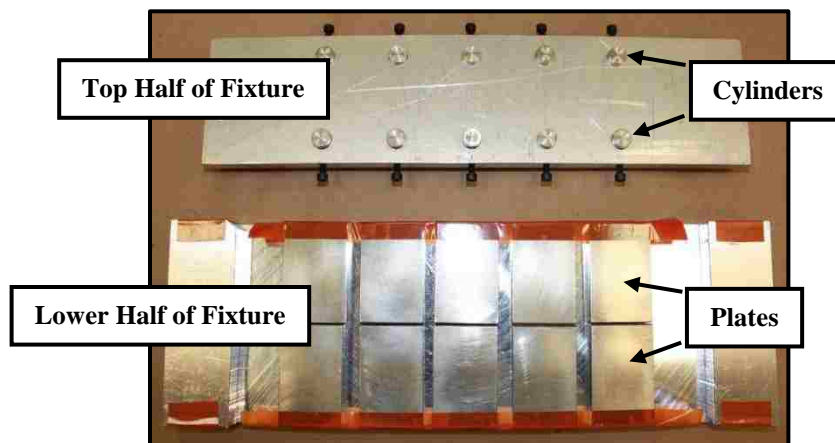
Coupon Curing Fixture w/ Cylinders and Plates
